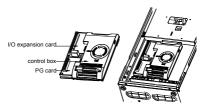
Schematic Diagram of Assembly & Disassembly of I/O Expansion
